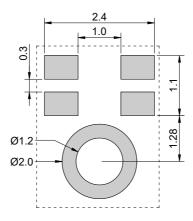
SDMO07D-36/1363 PCB Solder Pad Layout
